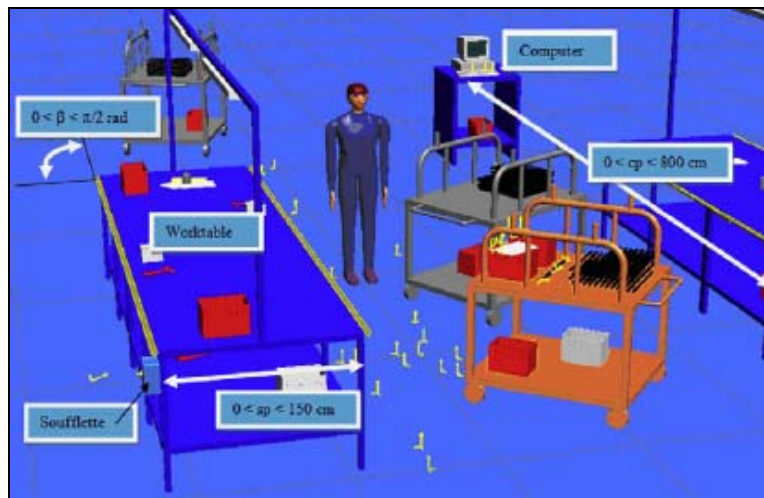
Actual configuration of Assembly workplace with design parameters
